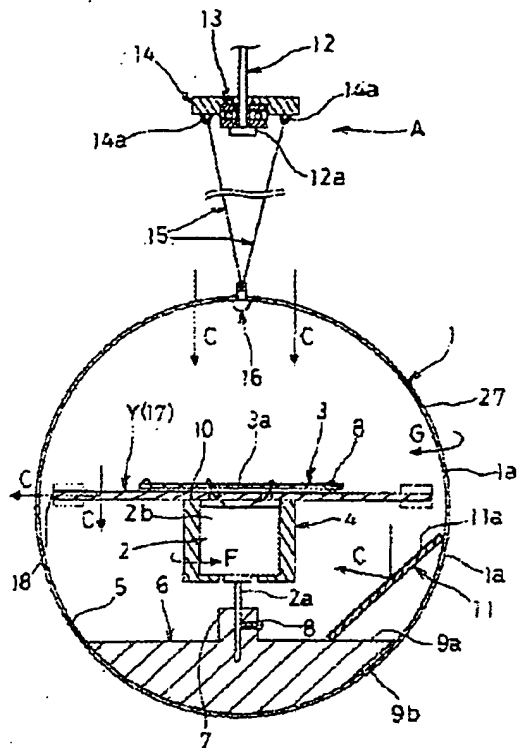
A partial cross-sectional front elevation showing a 6th embodiment.
